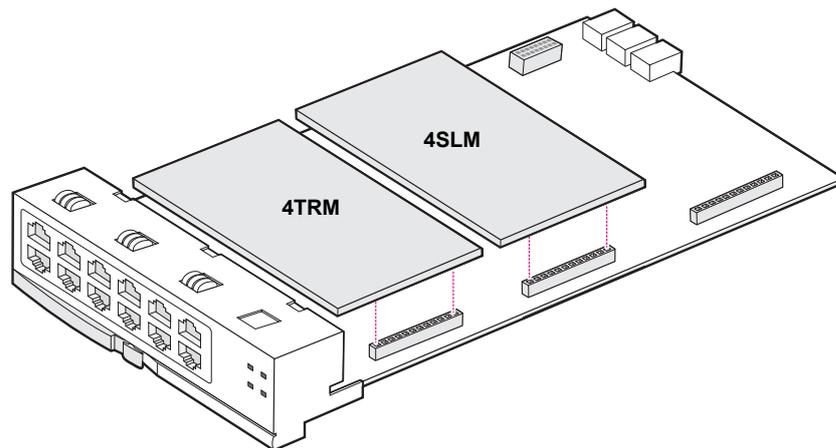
Option board of the UNI Board (Voice Trunk Line)
